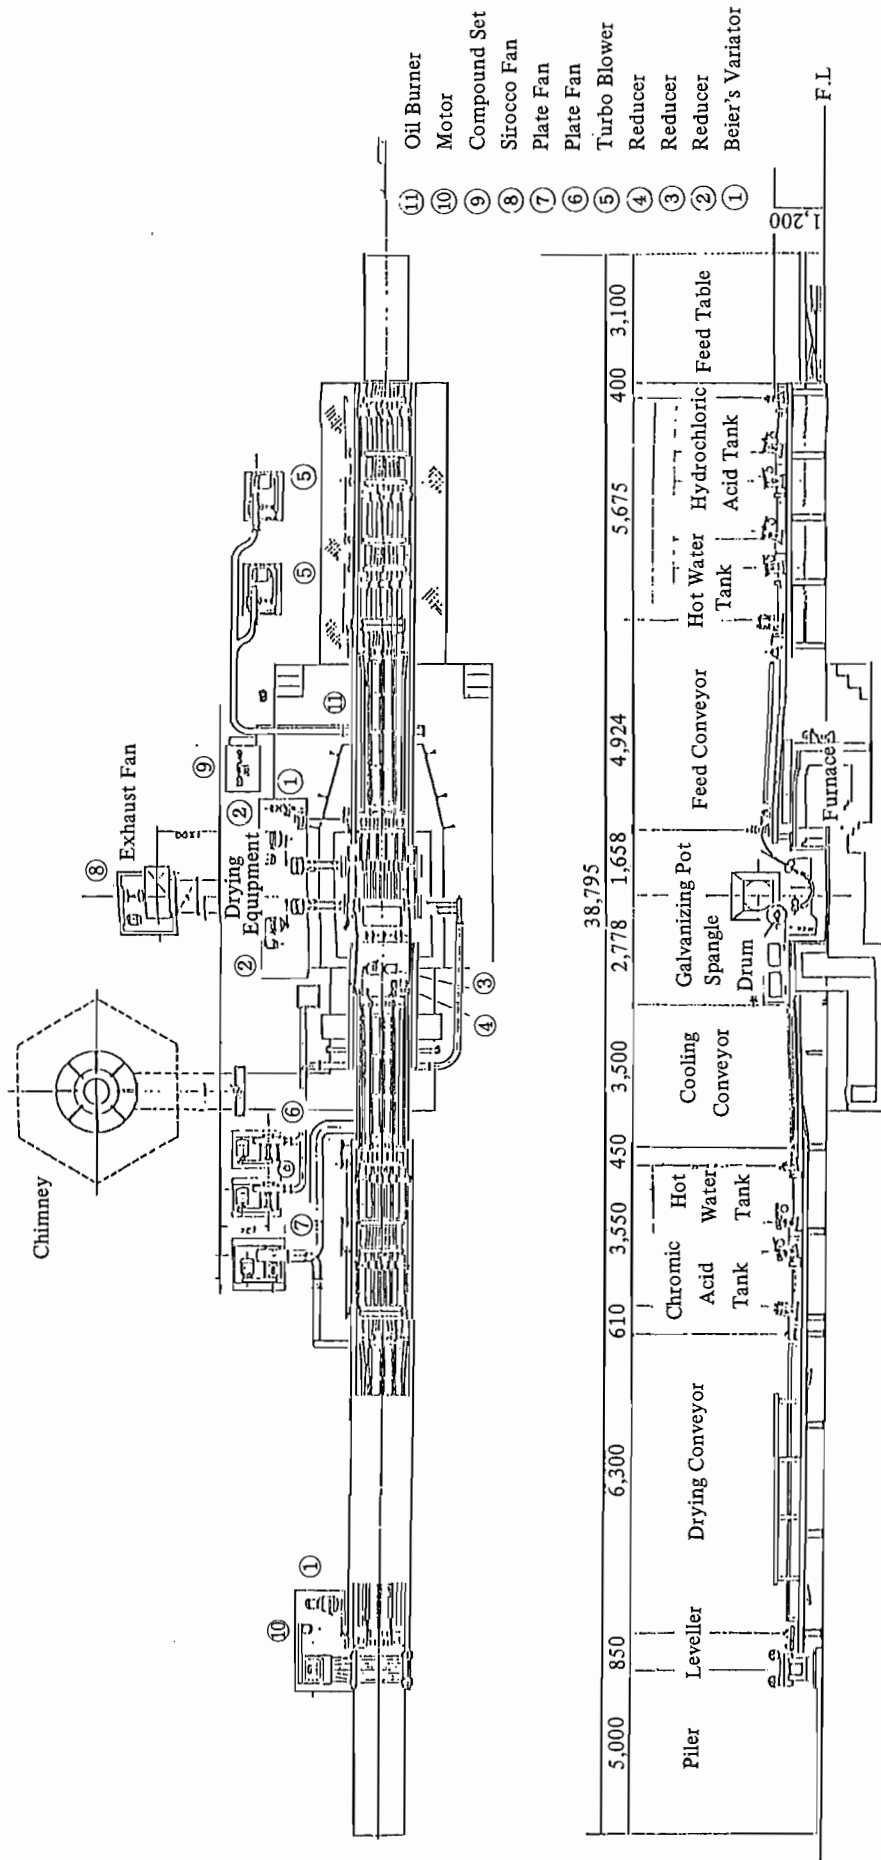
ARRANGEMENT OF GALVANIZING EQUIPMENT
